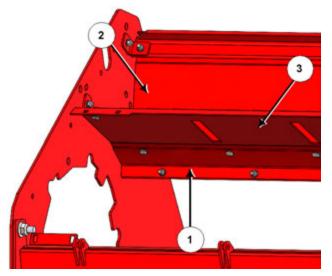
Install mid guard rod deflector (Flail drum not shown for clarity)
